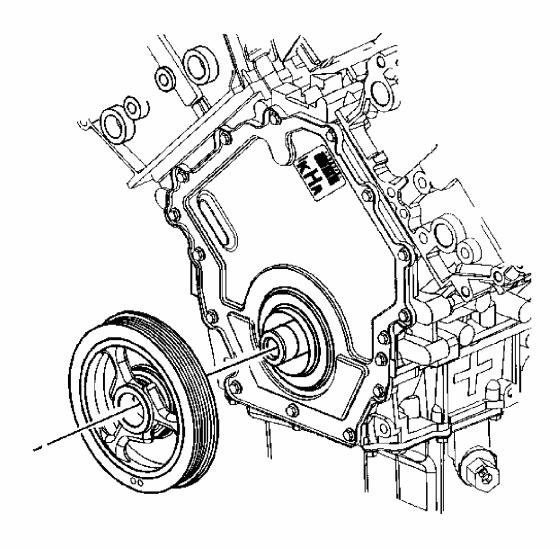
View of Crankshaft Balancer Courtesy of GENERAL MOTORS CORP.
